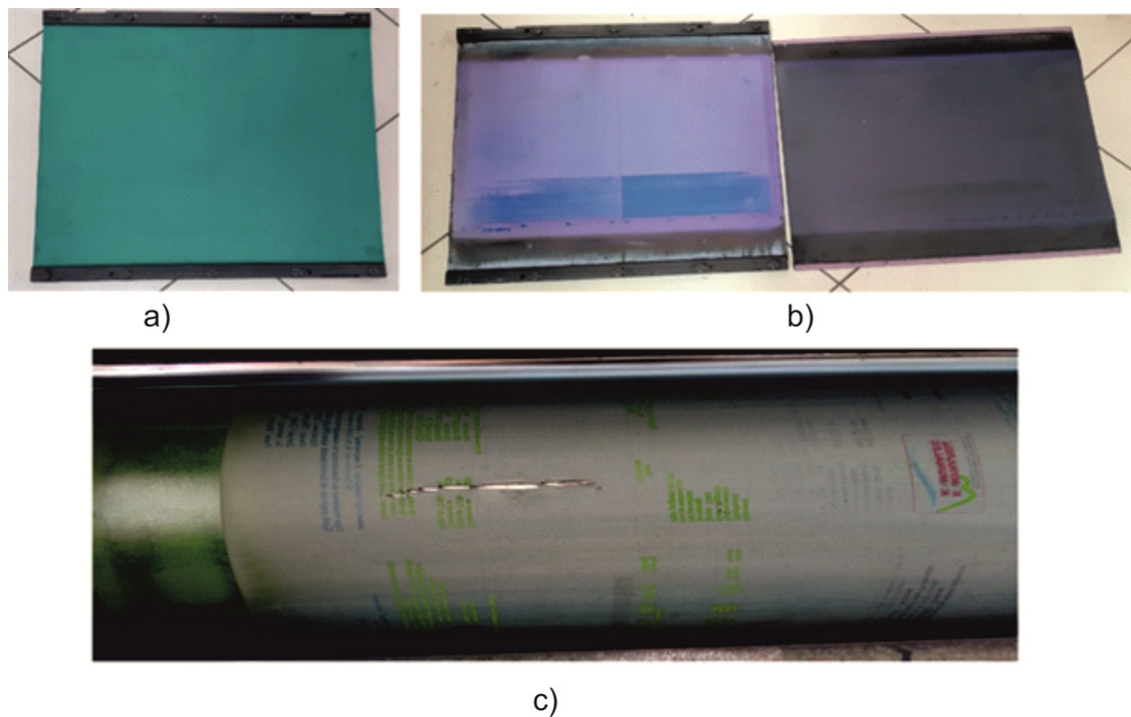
a) New offset printing rubber blanket; b) Retracted printing rubber blanket as defective; c) Removed printing rubber from a crack (deformation) caused by mechanical force)
